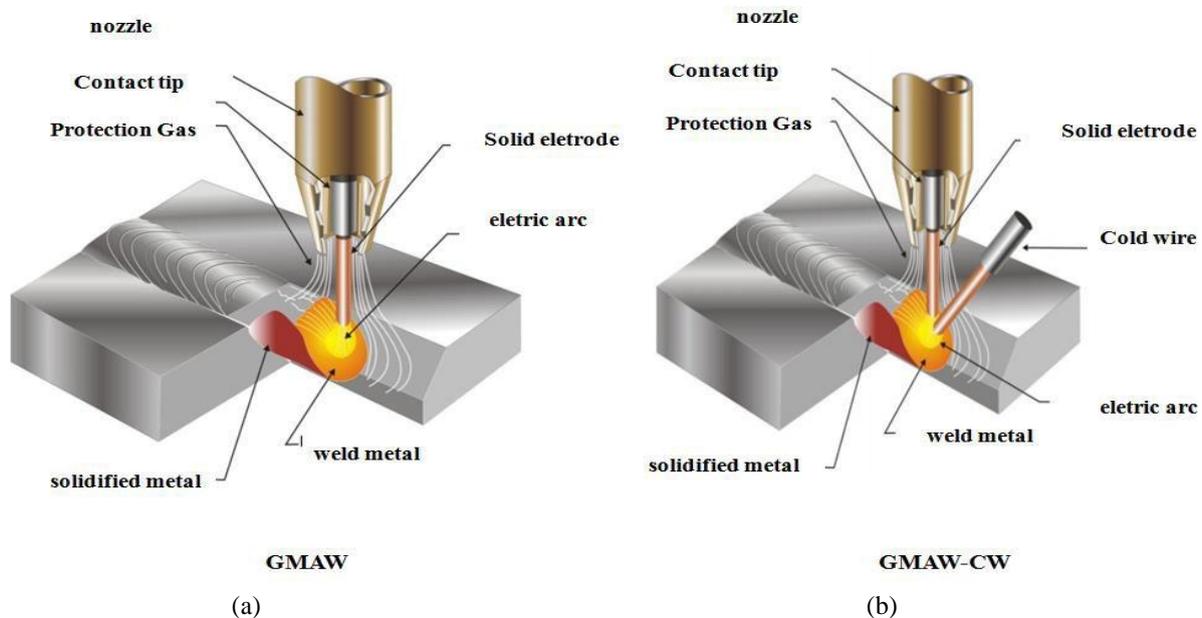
Schematic drawing of GMAW processes (a) and GMAW -CW (b).
